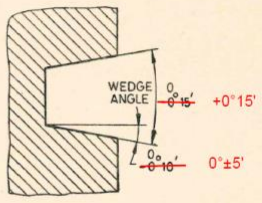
KEYSTONE RING GROOVE ANGULAR TOLERANCE
